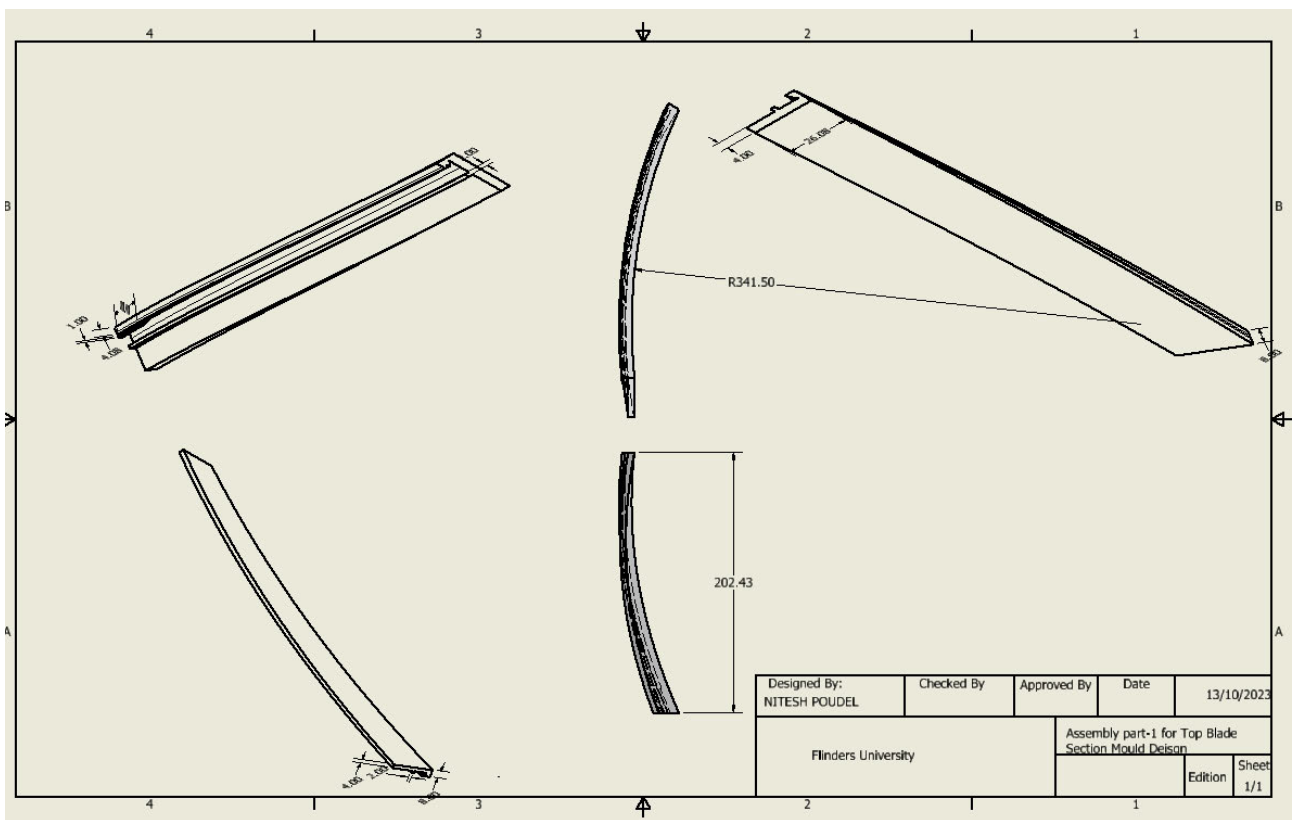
Assembly part-1 for Top Blade Section Mould Design
